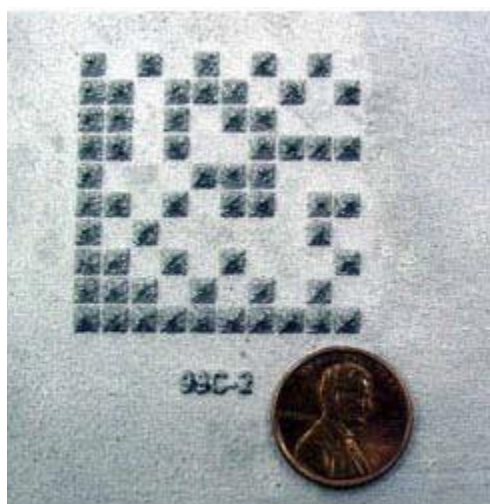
Aluminum data matrix symbol casting using a laser etched sand mold [9].
